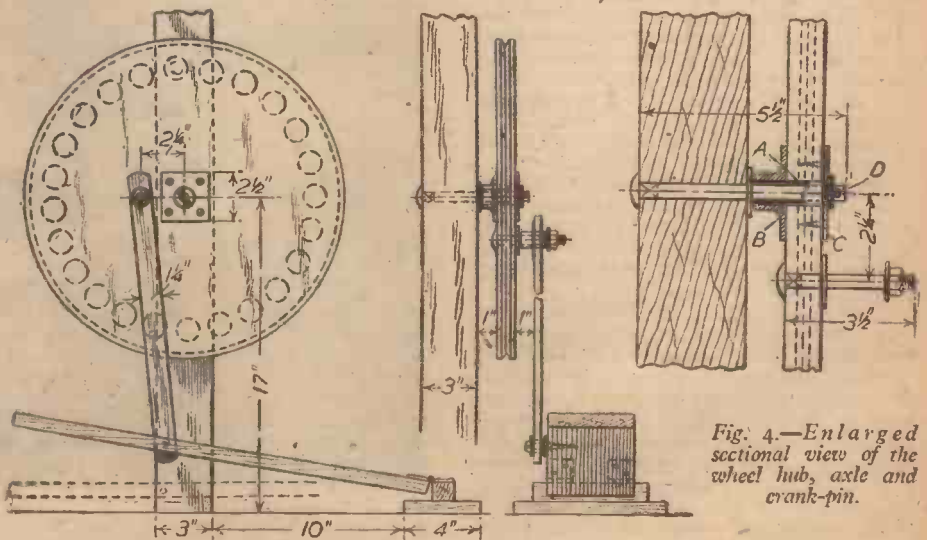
Enlarged sectional view of the wheel hub, axle and crank-pin.
